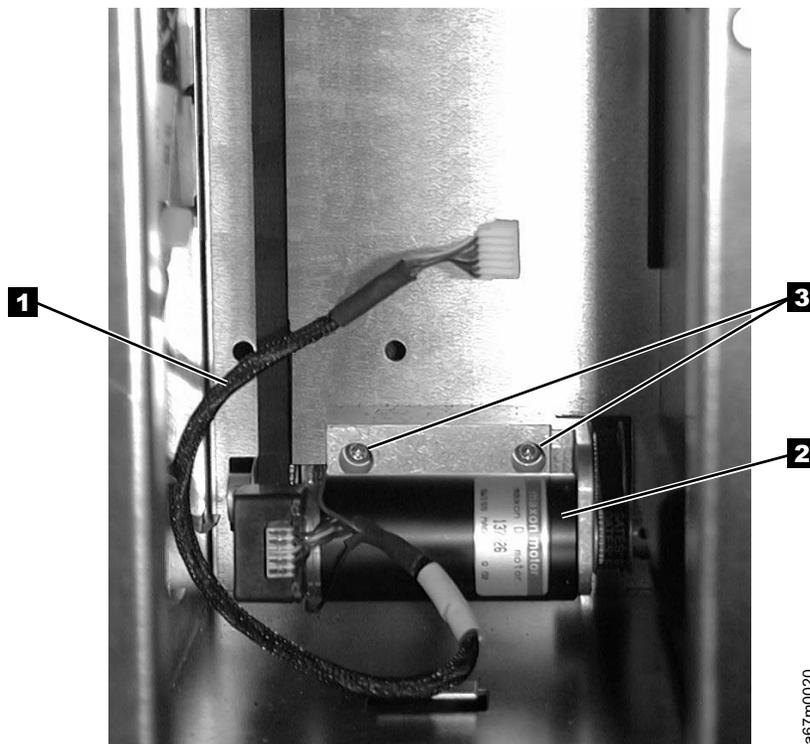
Y-Axis Motor Assembly Removal and Replacement
